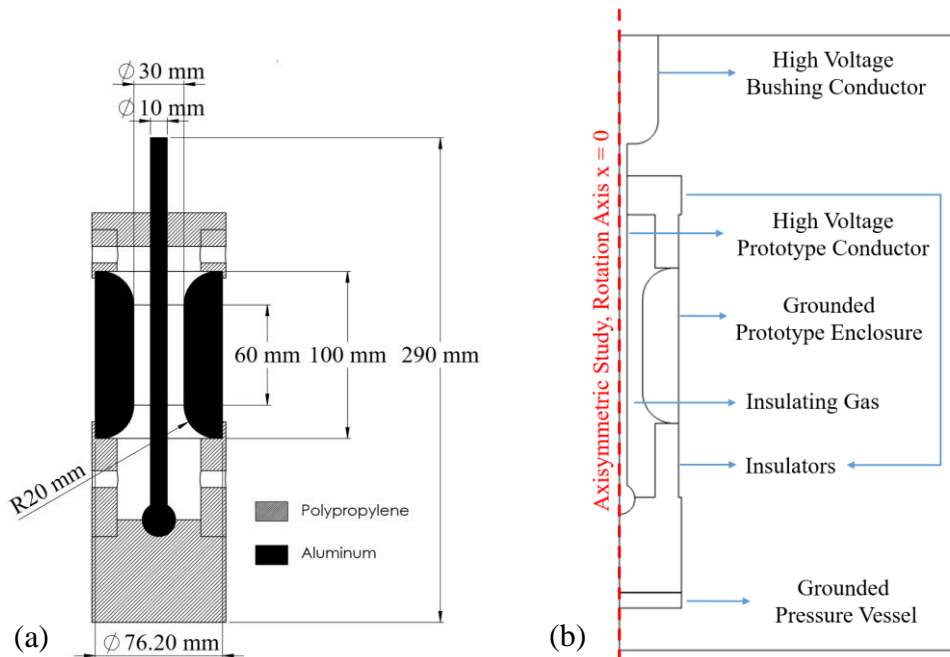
(a) Dimensions of the initial reduced-scale prototype (b) COMSOL model geometry structure.
